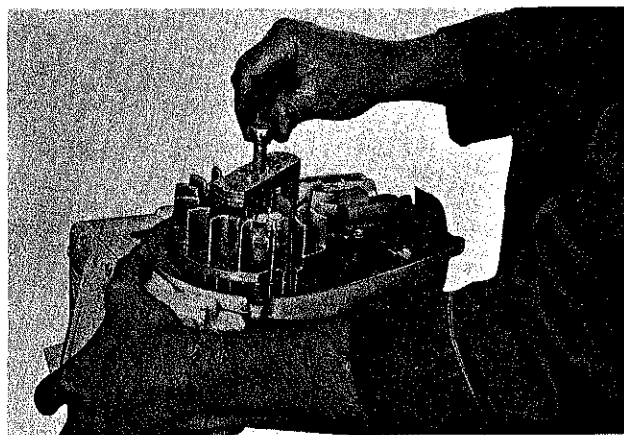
Removing the flywheel with a pulling tool. Be sure that the pulling screws are threaded at least 3/4-inch into the pulling holes to avoid stripping the threads. After a slight strain is made on the center screw, a light tap of a hammer on the center screw head will loosen the flywheel.
